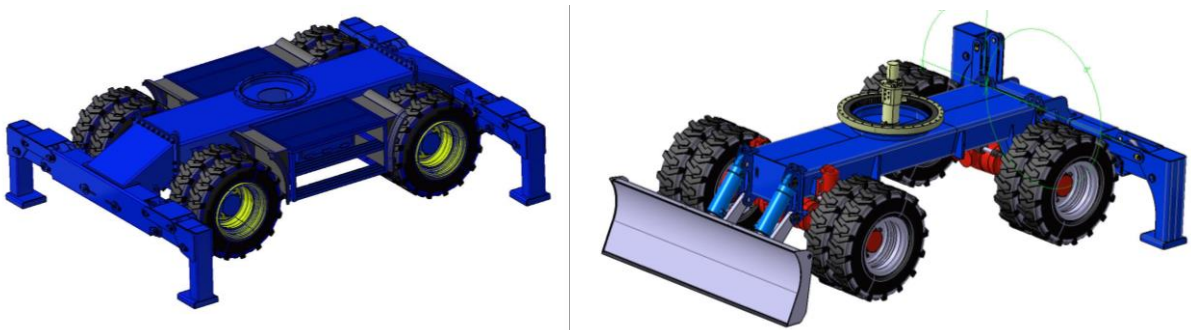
Wheeled chassis with two modules of stabilizers and with one front blade.
